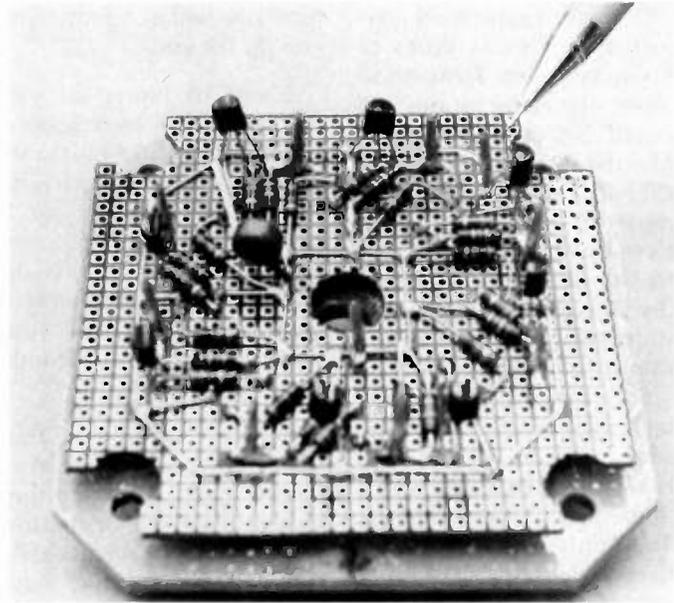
Photo E. The electronic components mounted on what we call a "do all" PC board. The pencil is pointed at one of the ten pins used to terminate the cable coming from the readout LEDs in the shack. The component at 10:00 o'clock near the shaft hole that looks like an overweight disc capacitor is the MOV.
